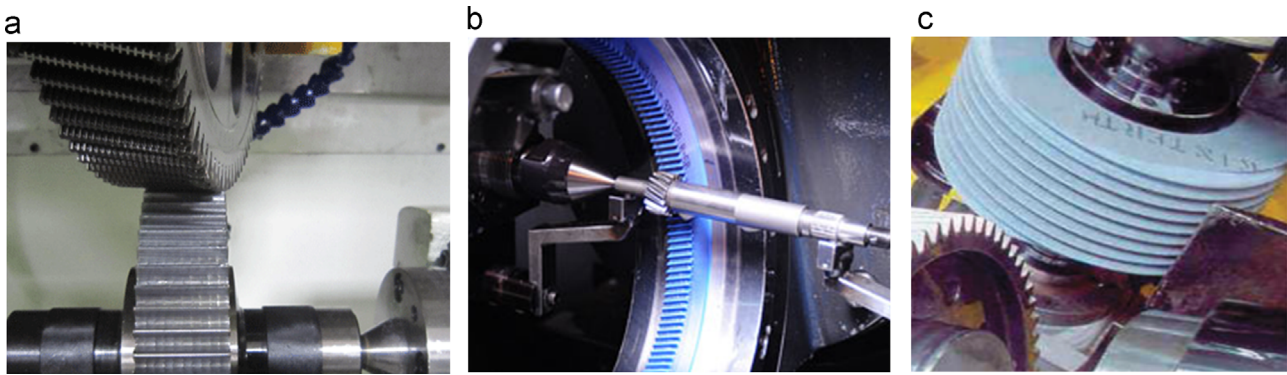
Tooth flank finishing processes: (a) shaving process, (b) power honing with internal meshing and (c) grinding with worm meshing [12].
